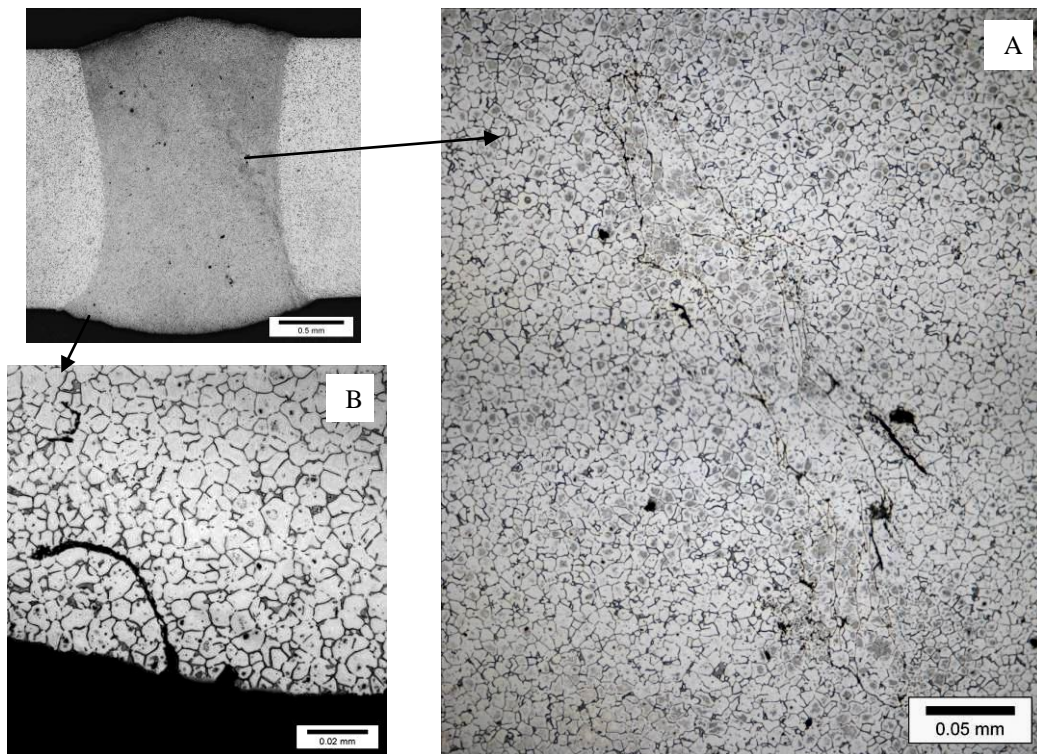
Solidification Cracks in the Sample Welded at 0.4 mm gap – End Section
